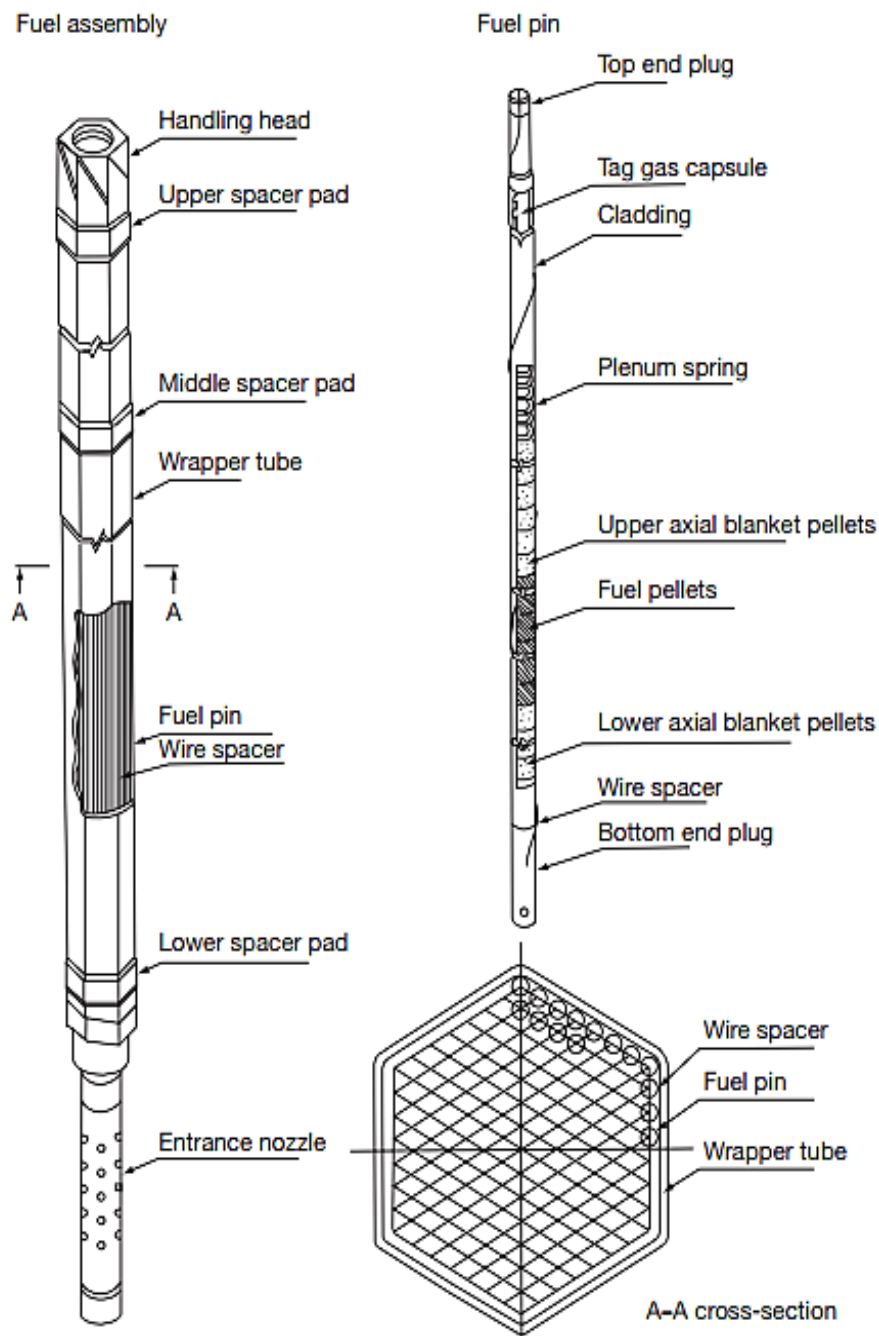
Fuel pin and fuel assembly for a typical liquid metal fast breeder reactor [1].
